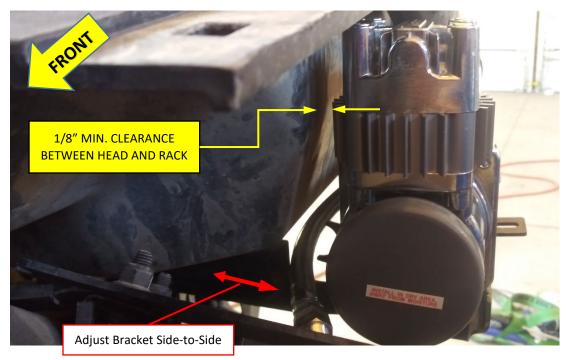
Air Compressor Clearance Adjustment (Shown installed on CARB Vehicle)
